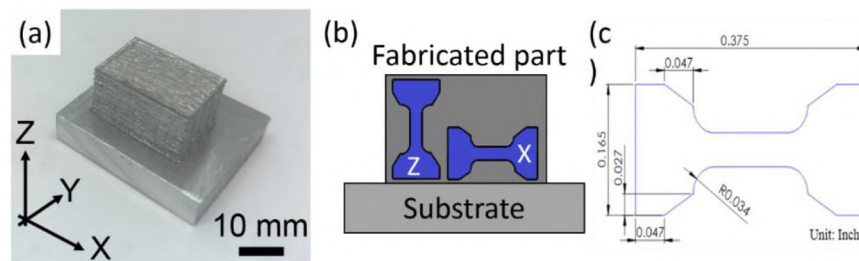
(a) Al-1100 alloys fabricated by LFP; (b) side view of a part fabricated by LFP showing how the X-axis direction and Z-axis direction tensile specimens were extracted; (c) dimensions of the tensile specimen.
